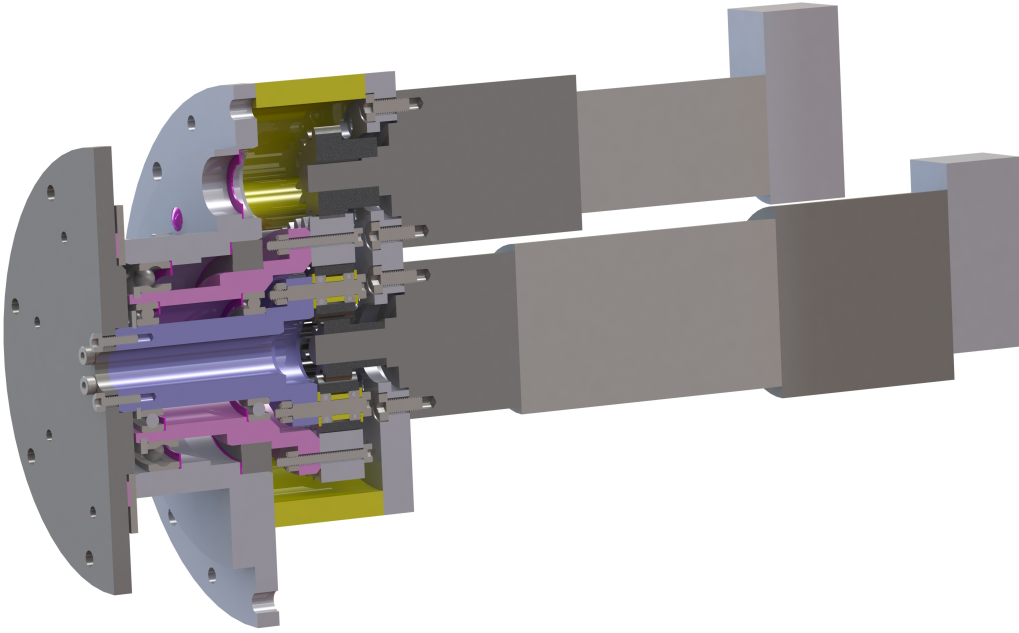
Section view of the CAD model of the revolute actuator prototype
